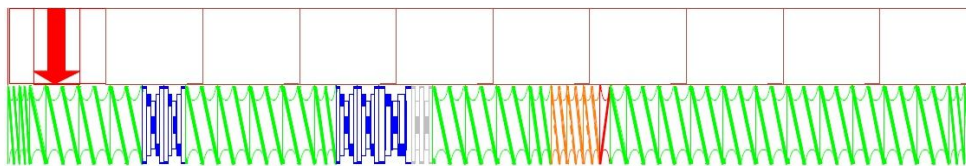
Screw configuration of the model extruder (green: conveying elements, blue and grey: kneading blocks, orange: distributive mixing elements, red: reverse conveying element)
